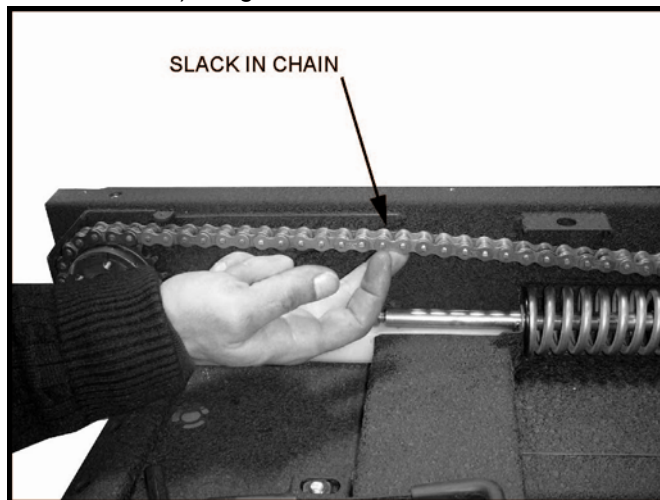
SLACK ON CHAIN (LH SIDE SHOWN)
